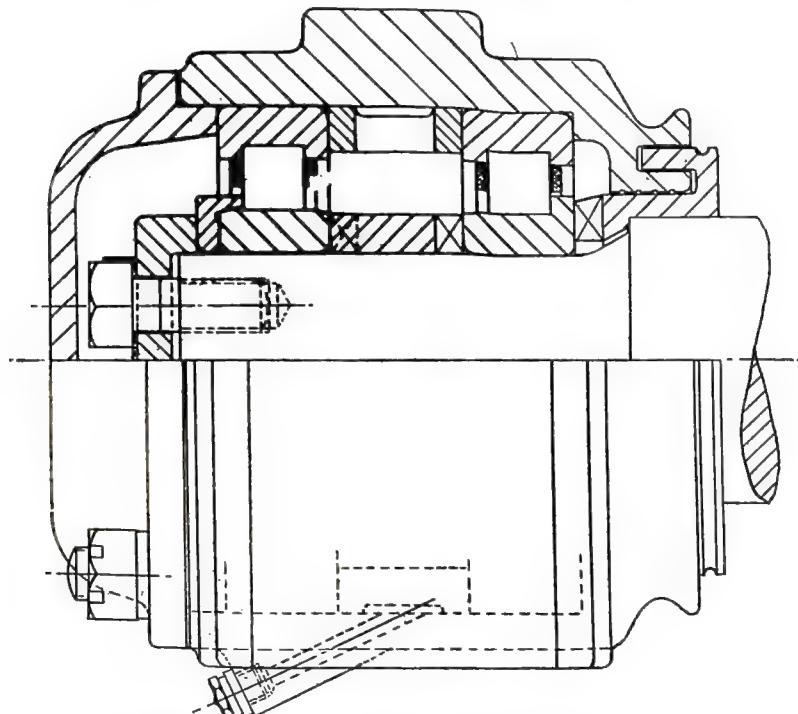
Roller Bearings to Steel Works Car Axle Box.
